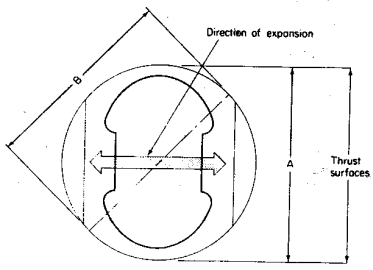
Piston cam shape. The largest diameter is across the thrust surfaces perpendicular to the piston pin (lettered "A").
